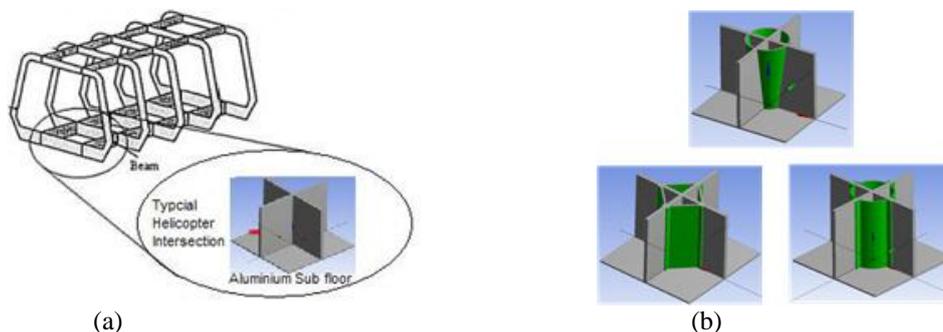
(a) Typical type of helicopter subfloor (b) Proposed energy absorbing hybrid material reinforcement design for subfloor
